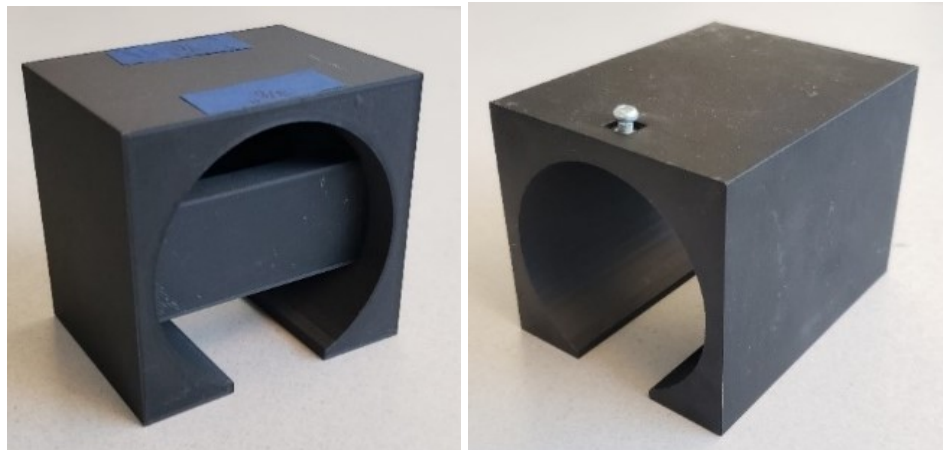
2-part cutting jig oblique view, the grip (right) and cutting guide (left)
